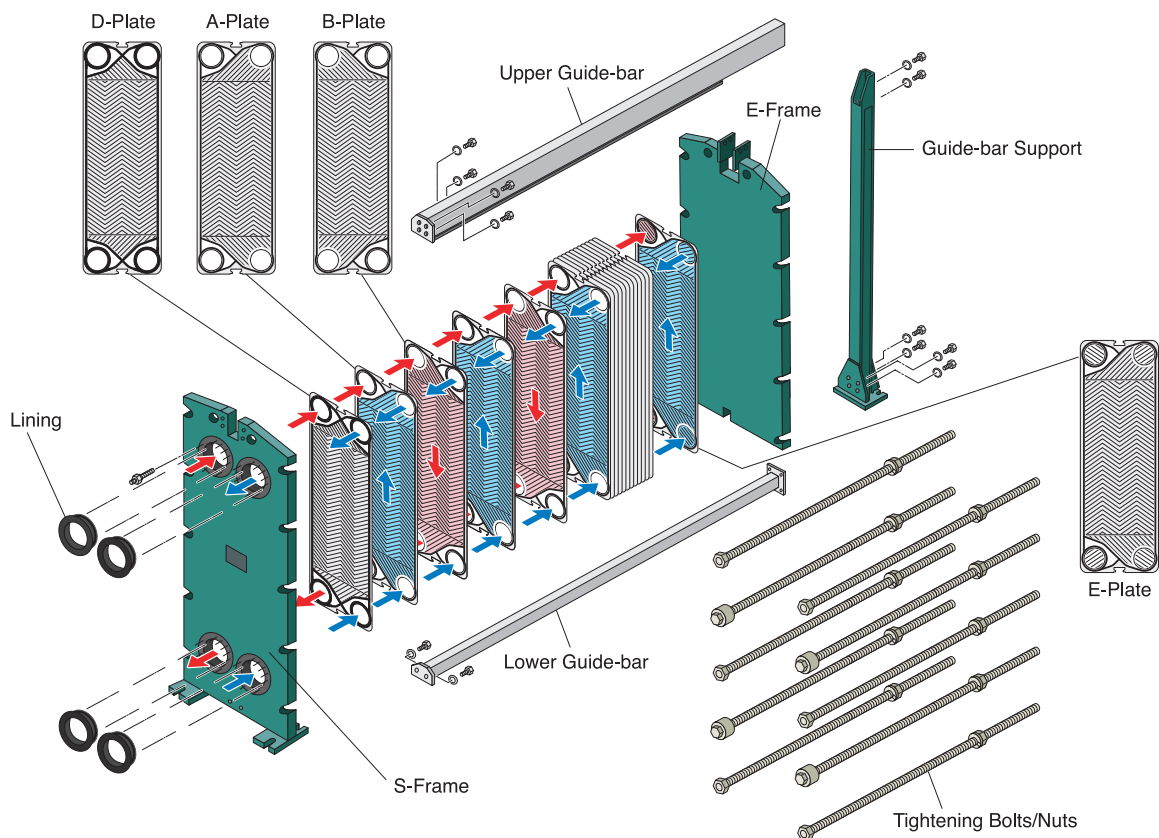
Schematic depicting a disassembled gasketed plate heat exchanger. (*From Hisaka Works, Ltd.*)
